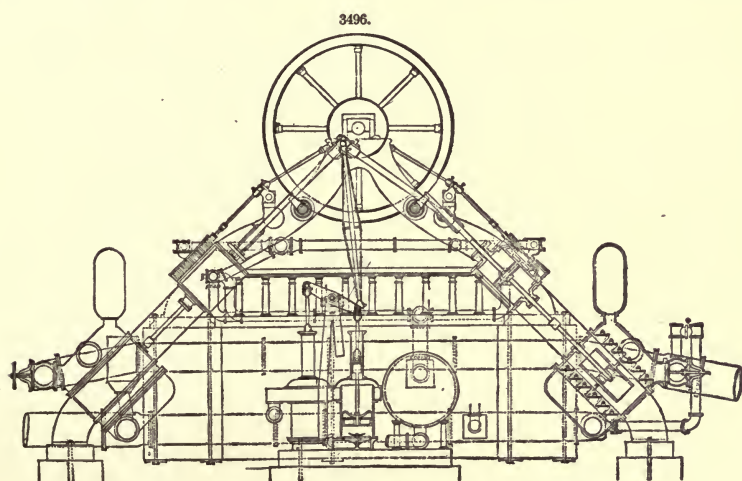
Holly Quadruplex Pumping Engine, Sectional.
